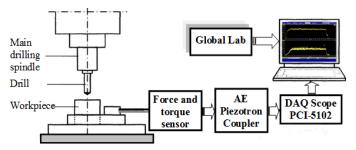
Set-up for measurement of axial force and torque in drilling [1]
